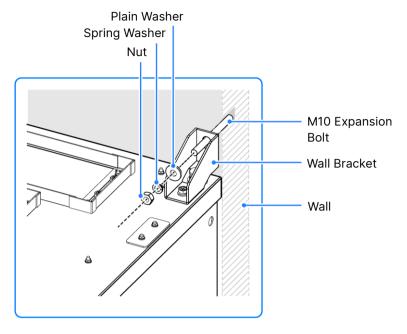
100/ 120kVA UPS\_ Install the Wall Bracket against the Wall
